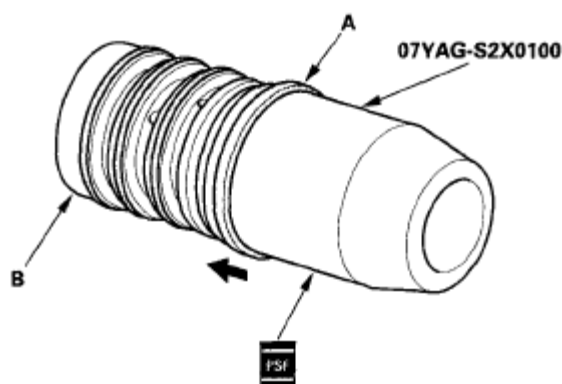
Identifying Area Applying Power Steering Fluid To Surface Of Sleeve Seal Ring Guide
